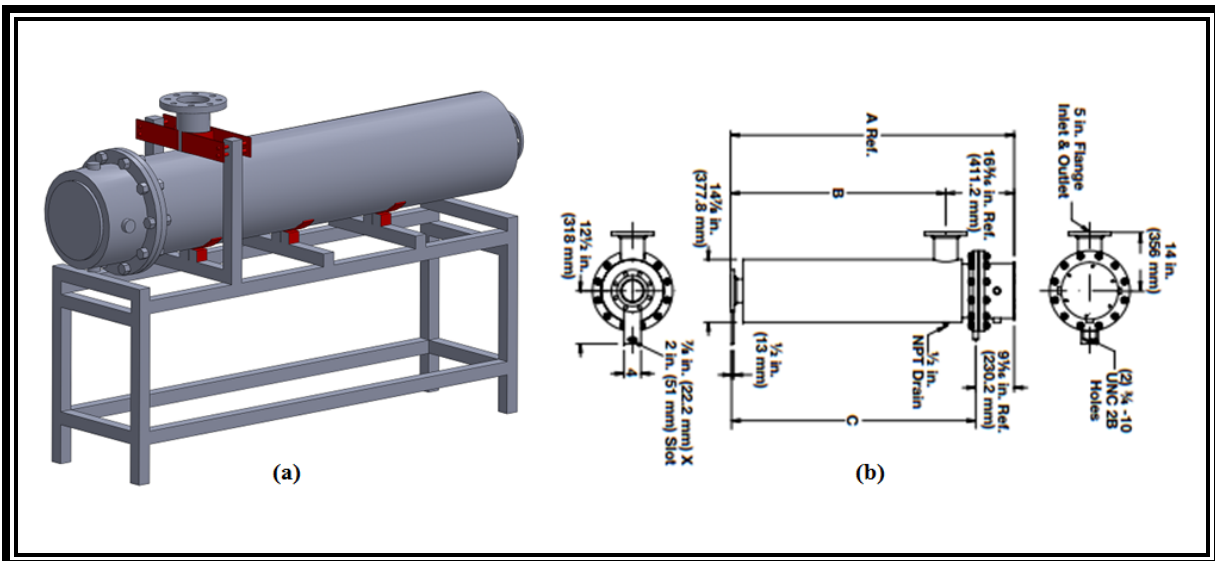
35: Heater schematic. (a) CAD model, (b) detailed dimensions
